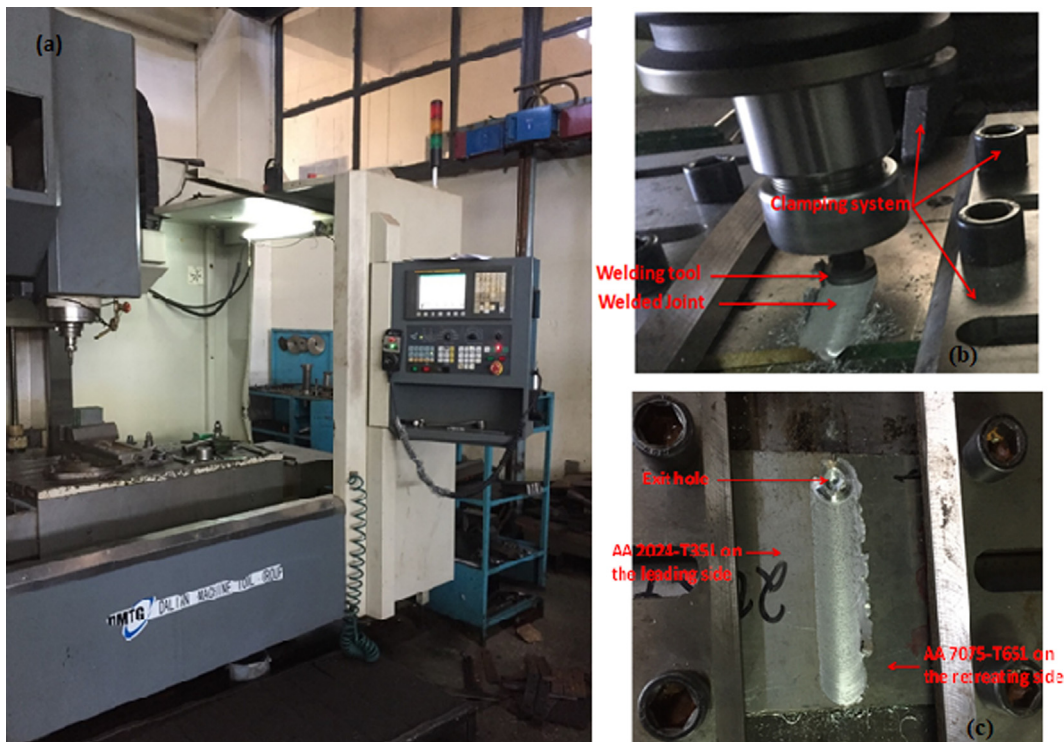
(a) Fanuc oi-MC Control DMTG VDF- 1200 CNC Vertical Machining Center for FSW. (b) Friction stir welding process (c) FSWed joint.
